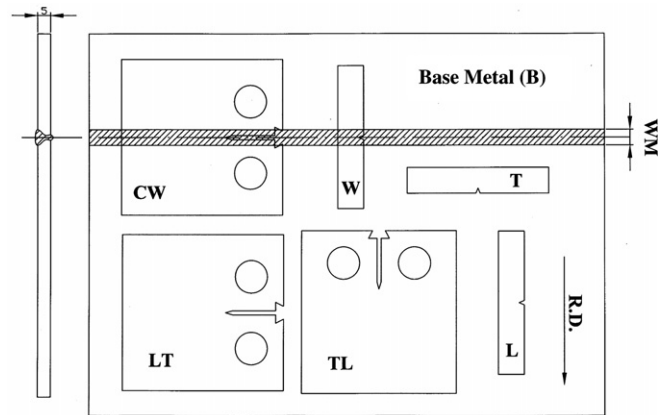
The schematic diagram showing Charpy impact and compact tension specimens sectioned from the laser-welded steel plate.
